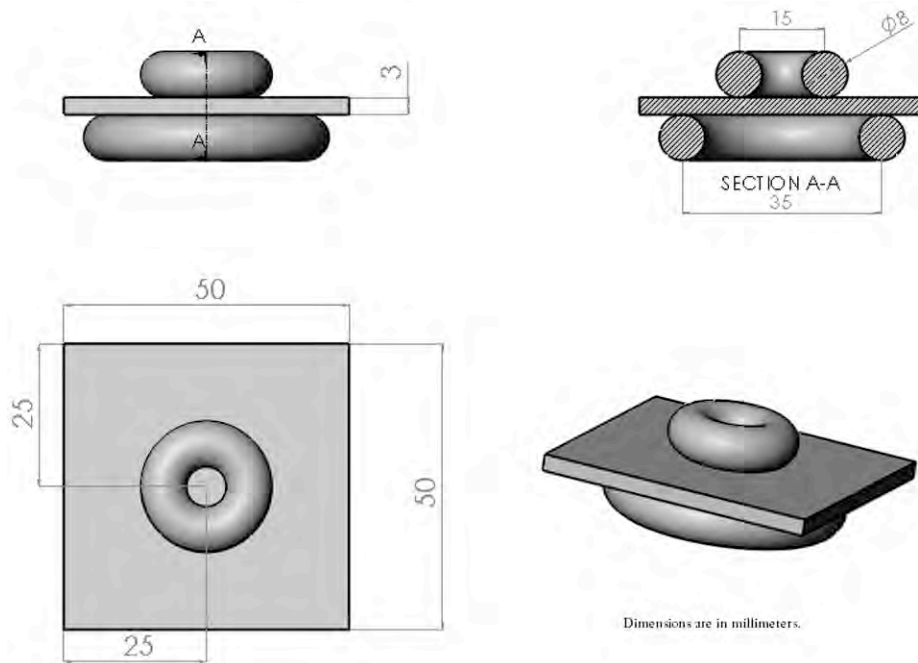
Schematic of the ring-on-ring bend test configuration. Dimensions in mm.
